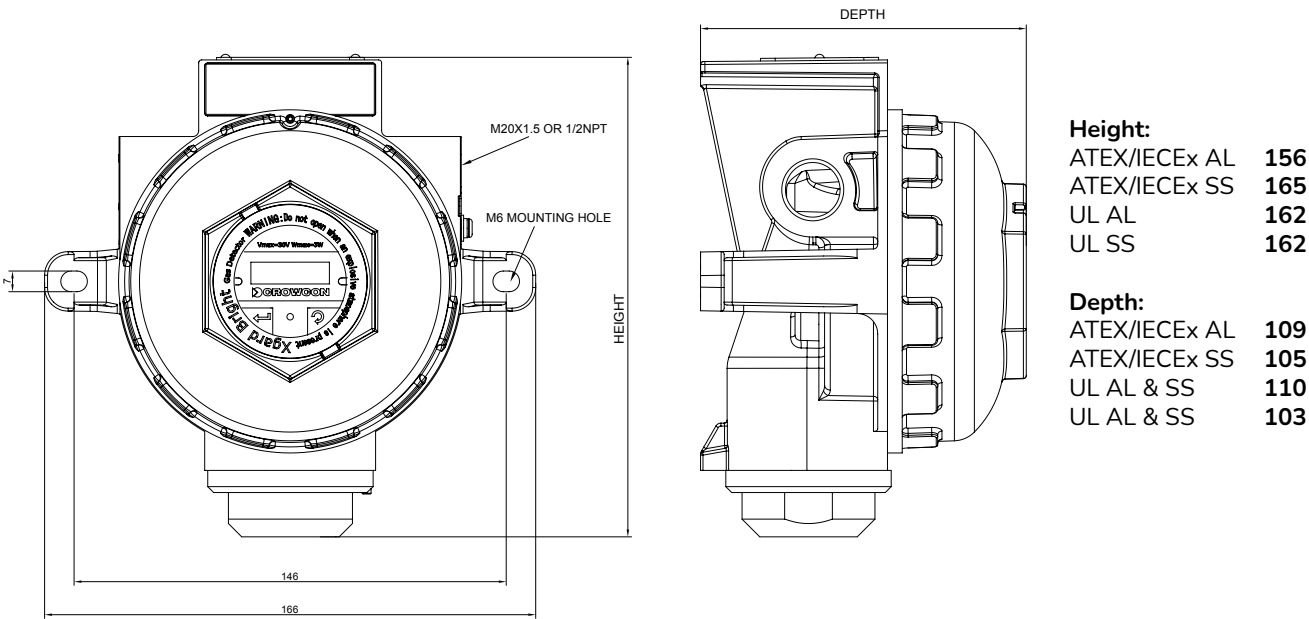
Xgard Bright dimensioned view - all dimensions in millimetres
